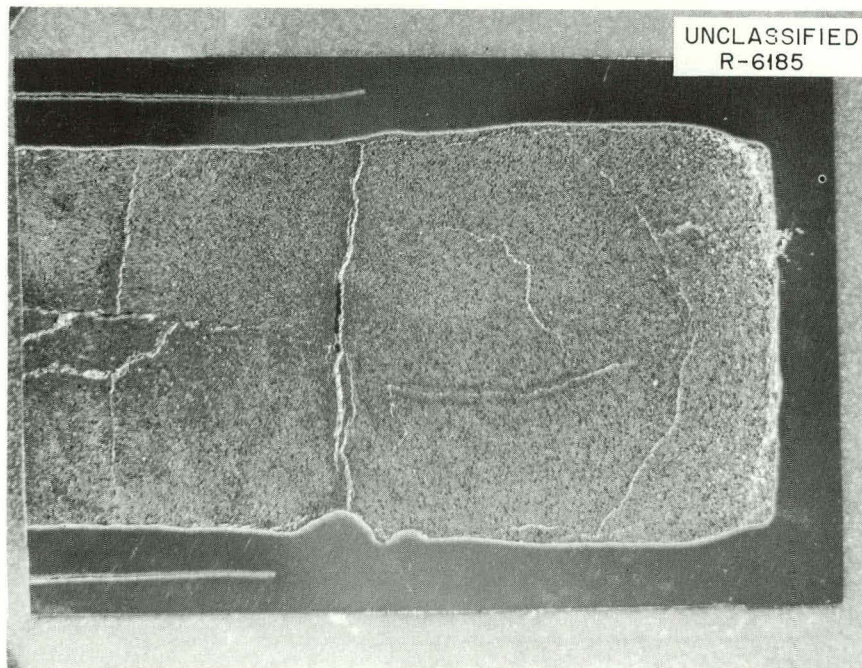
Longitudinal Section of Bottom End Plug in Fuel Rod 1N1. Note excessive penetration of weld metal into fuel. As polished. ~6X
